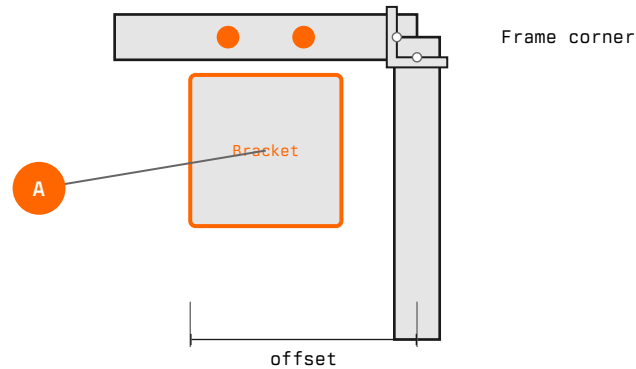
Motor bracket position at frame corner. All 4 corners mirror this layout.
